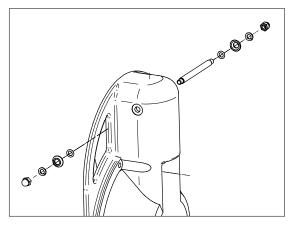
Pump TX820:* Push the stopper rod through the housing. Mount o-ring, stopper flanges and domed nuts and then tighten.
